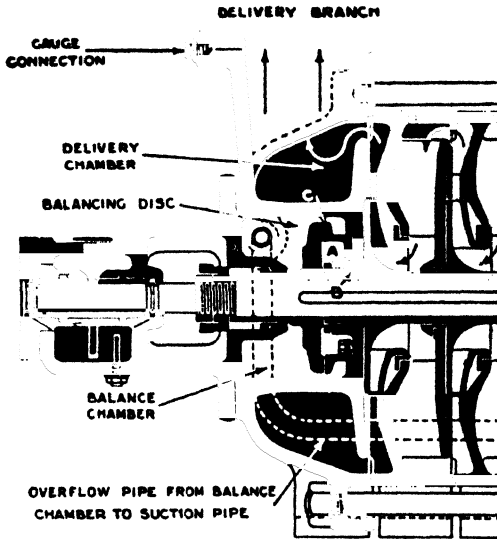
SHOWING METHOD OF BALANCING AXIAL THRUST
